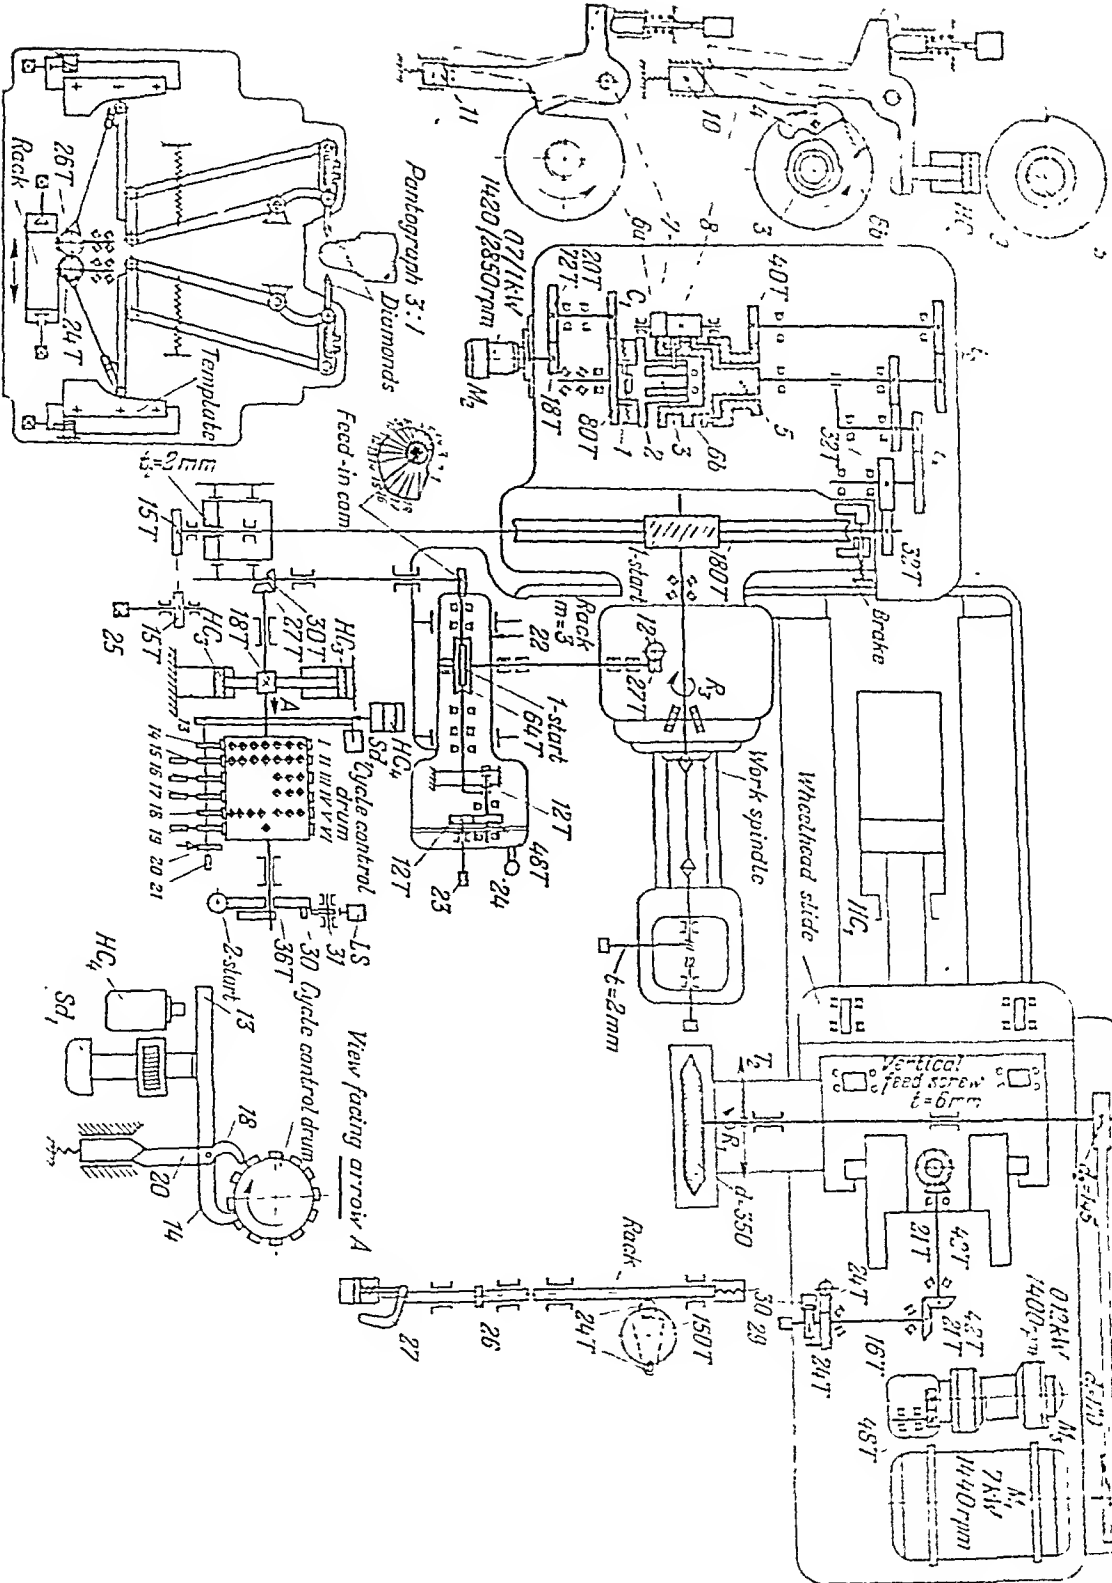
Kinematic diagram of the semi-automatic gear-grinding machine model 586, made by the Moscow Machine Tool Plant, MSZ (structure class E33)
